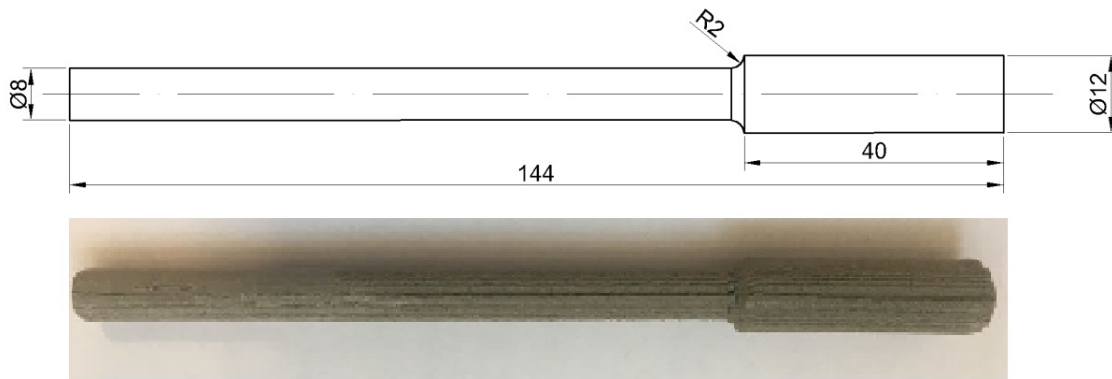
Top. Actual dimensions and shape. Bottom. Overview of the specimen manufactured.
